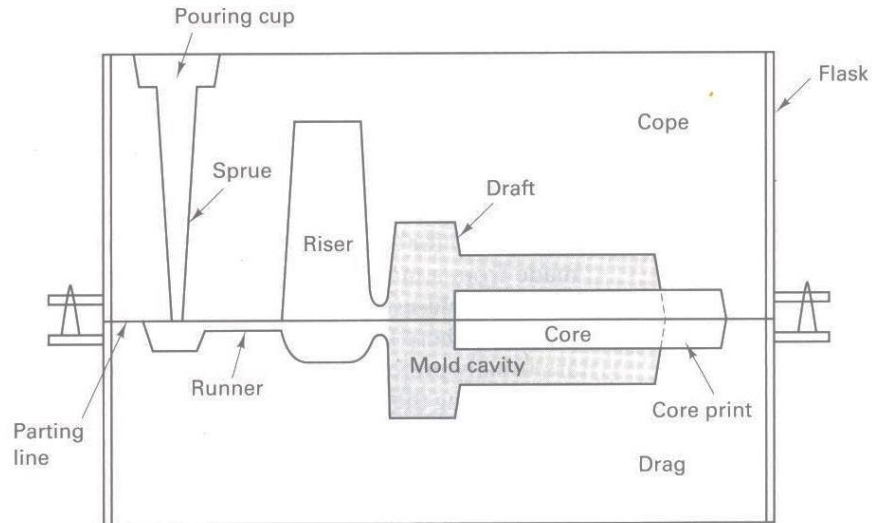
Schematic of a sand mold for metal casting. The metal is poured into the pouring cup and it travels through the runners to finally reach the mold cavity. The mold itself is a two-part sand mold which splits the final part down the center horizontally [17]. The metal mold shown in Figure 2.10 displays a riser, which is an extra source of molten metal to fill the mold cavity as it begins to solidify and shrink. By design, the riser will be the last to solidify and will contain all the shrinkage voids. After solidification the mold can be removed to recover the final part. The final part will have a parting line that is made from the two-piece mold [17].
